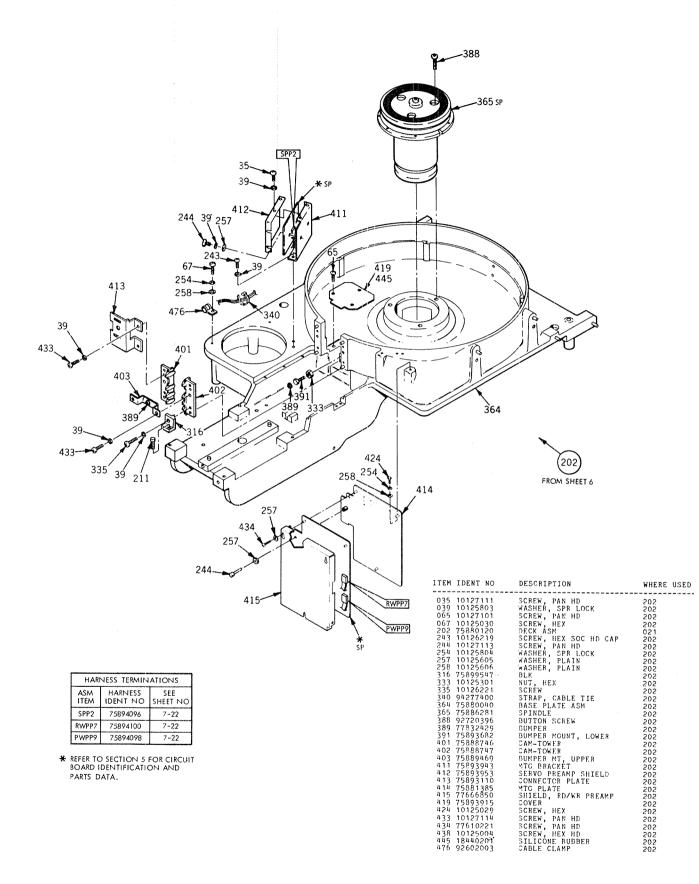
DECK ASSEMBLY (SHEET 1 of 3)
